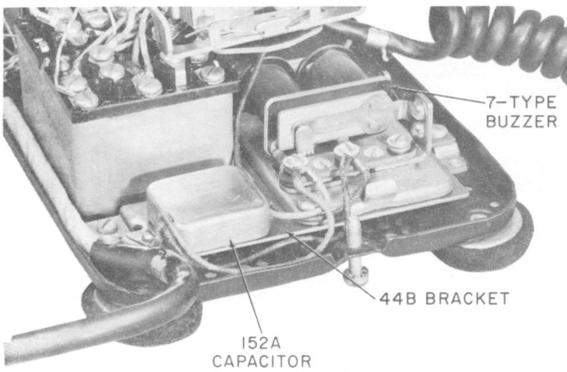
Mounting of 7-Type Buzzer and 152A Capacitor on 44B Bracket
